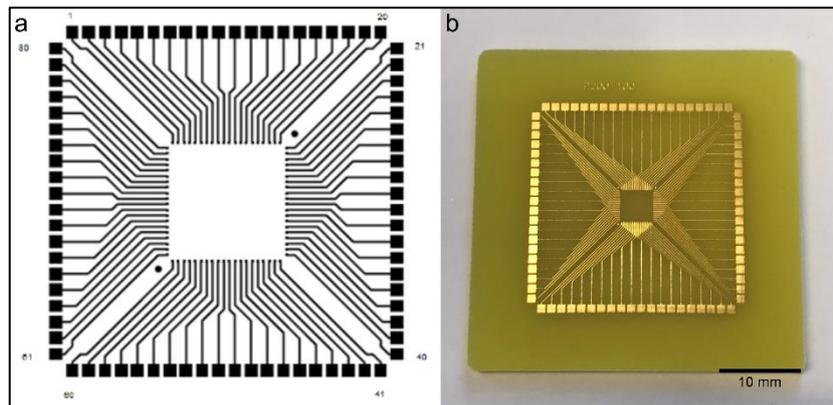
(a) schematic and (b) photograph of printed wiring structure of the PCB substrates.
